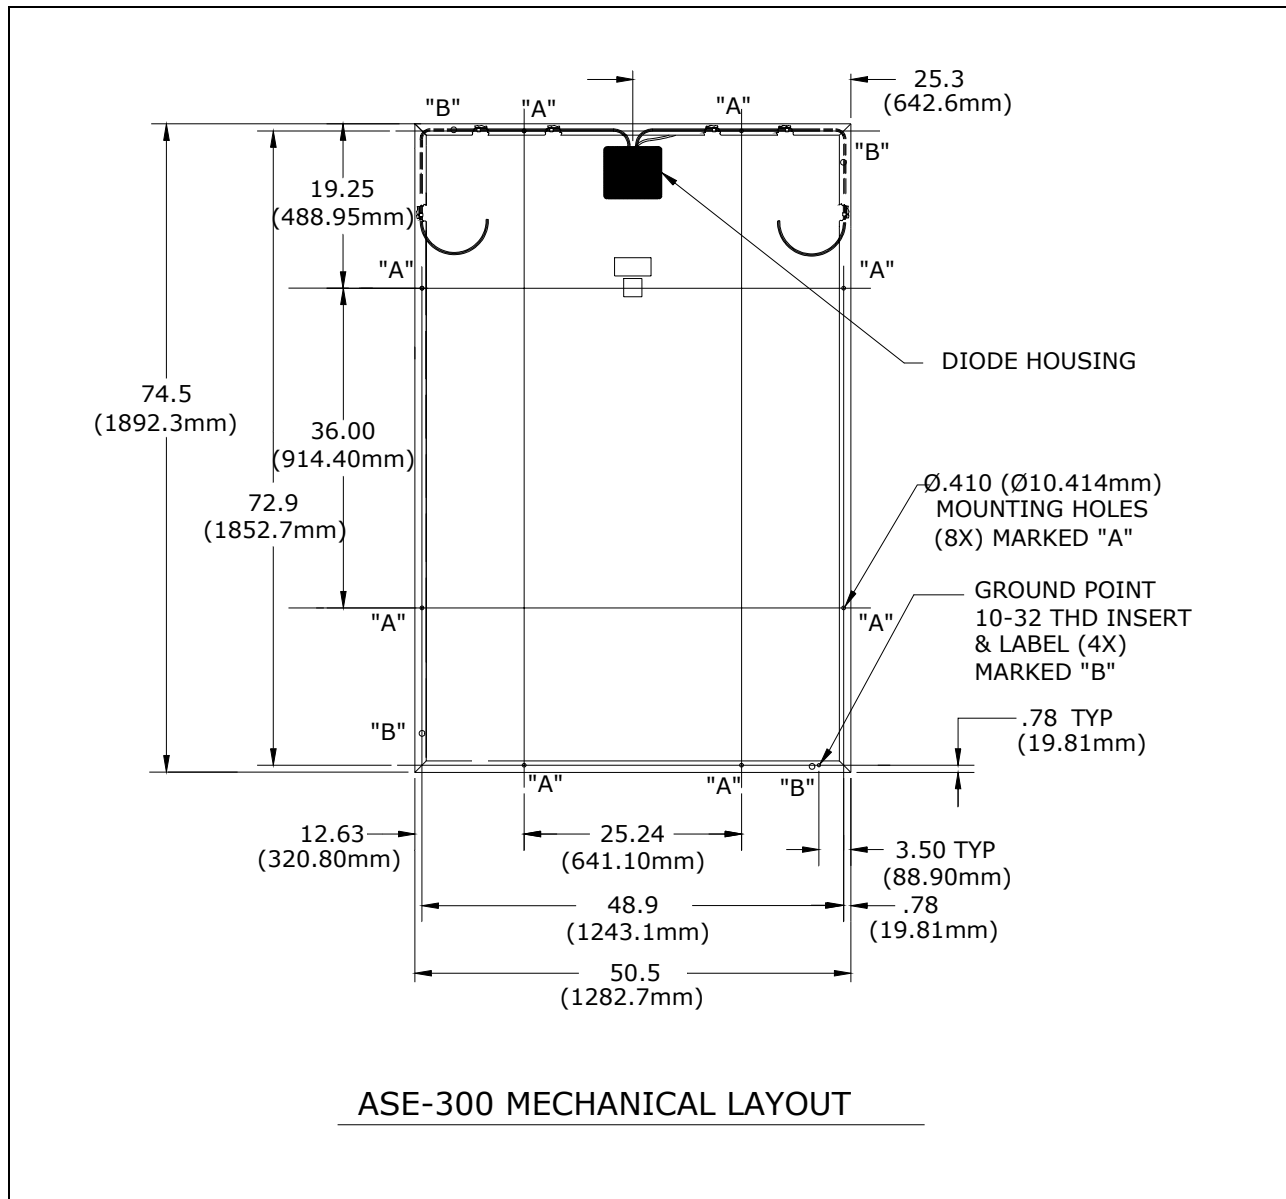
ASE-300-DGF/50 Mechanical Layout
